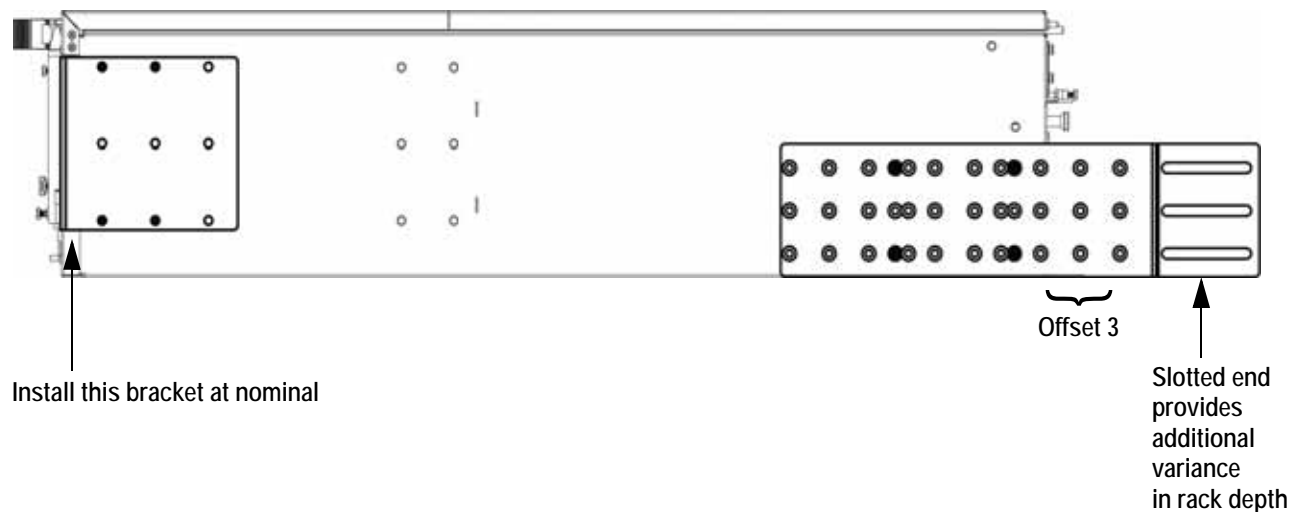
Bracket Mounting for 31.5" to 33" Rack
